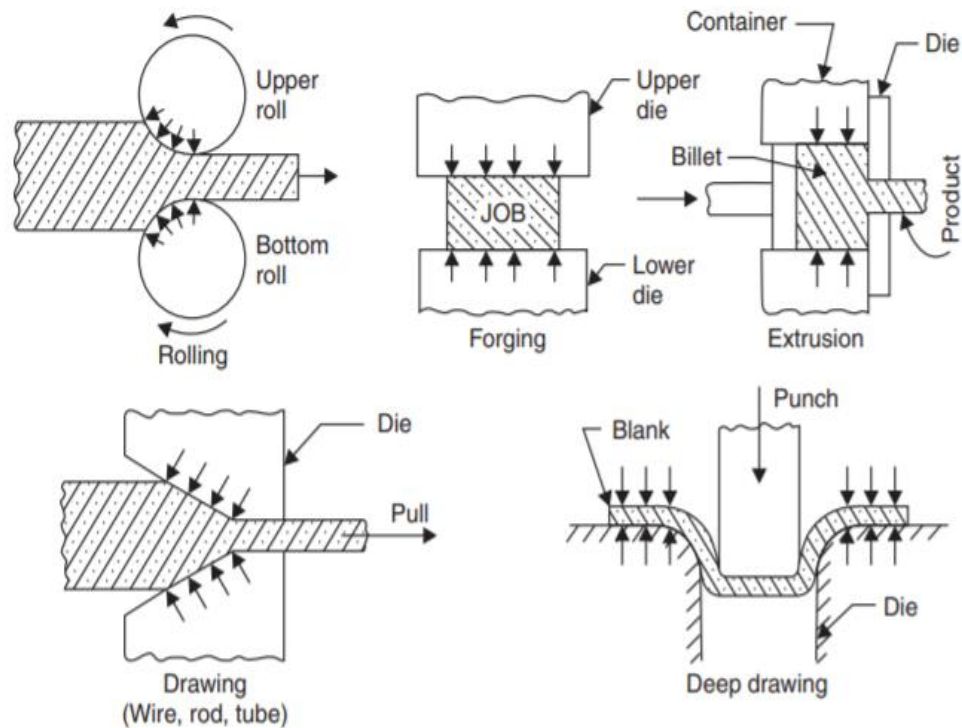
explains the 4 types of technologies: A. Rolling, B. Forging, C. Extrusion, D. Drawing, and E. Deep drawing [21].
